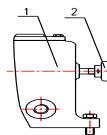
Farm Machinery Lowering Speed Adjustment 1. Lift Cover 2. Lower Speed Adjustment Handle
